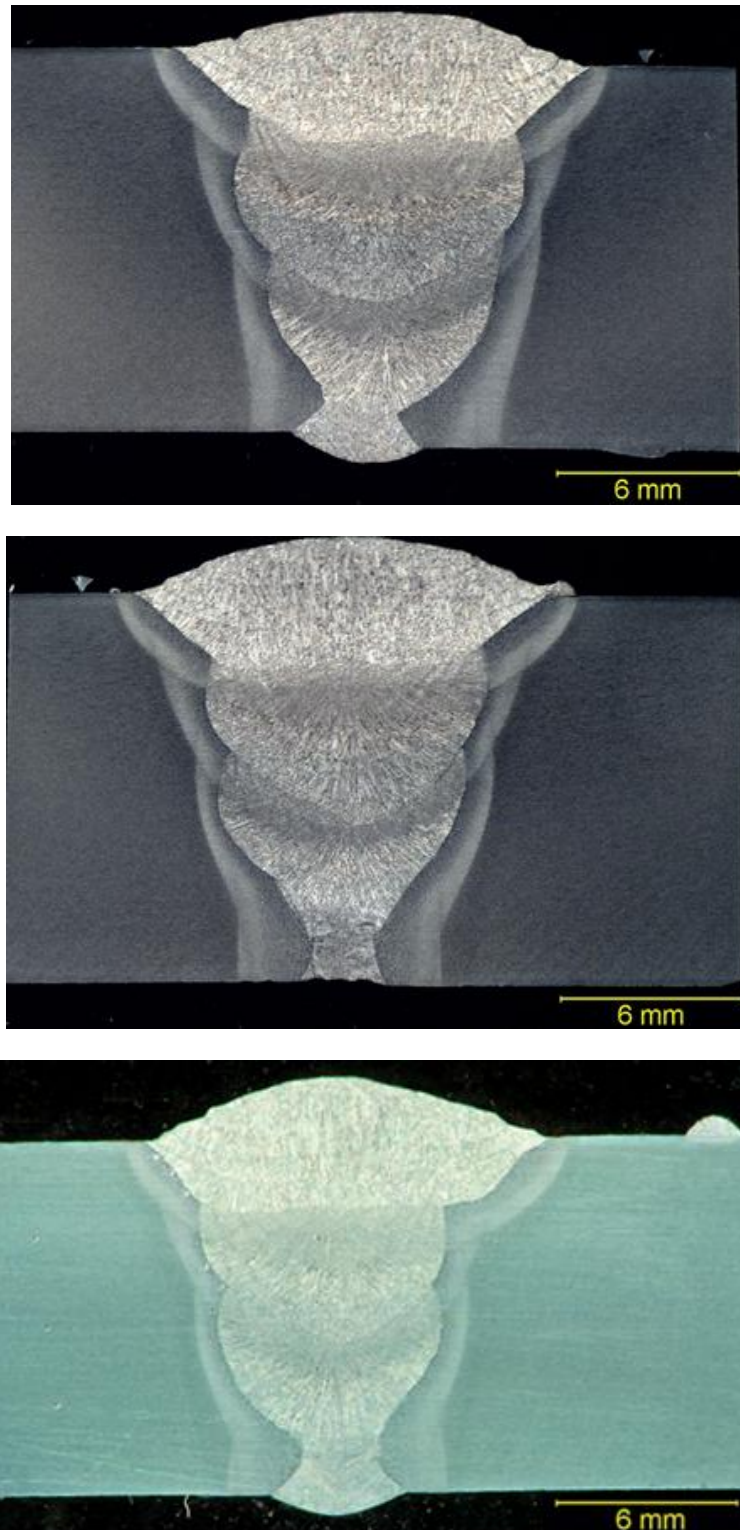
Girth weld macro of the 1st production weld of high Y/T X65 pipe
